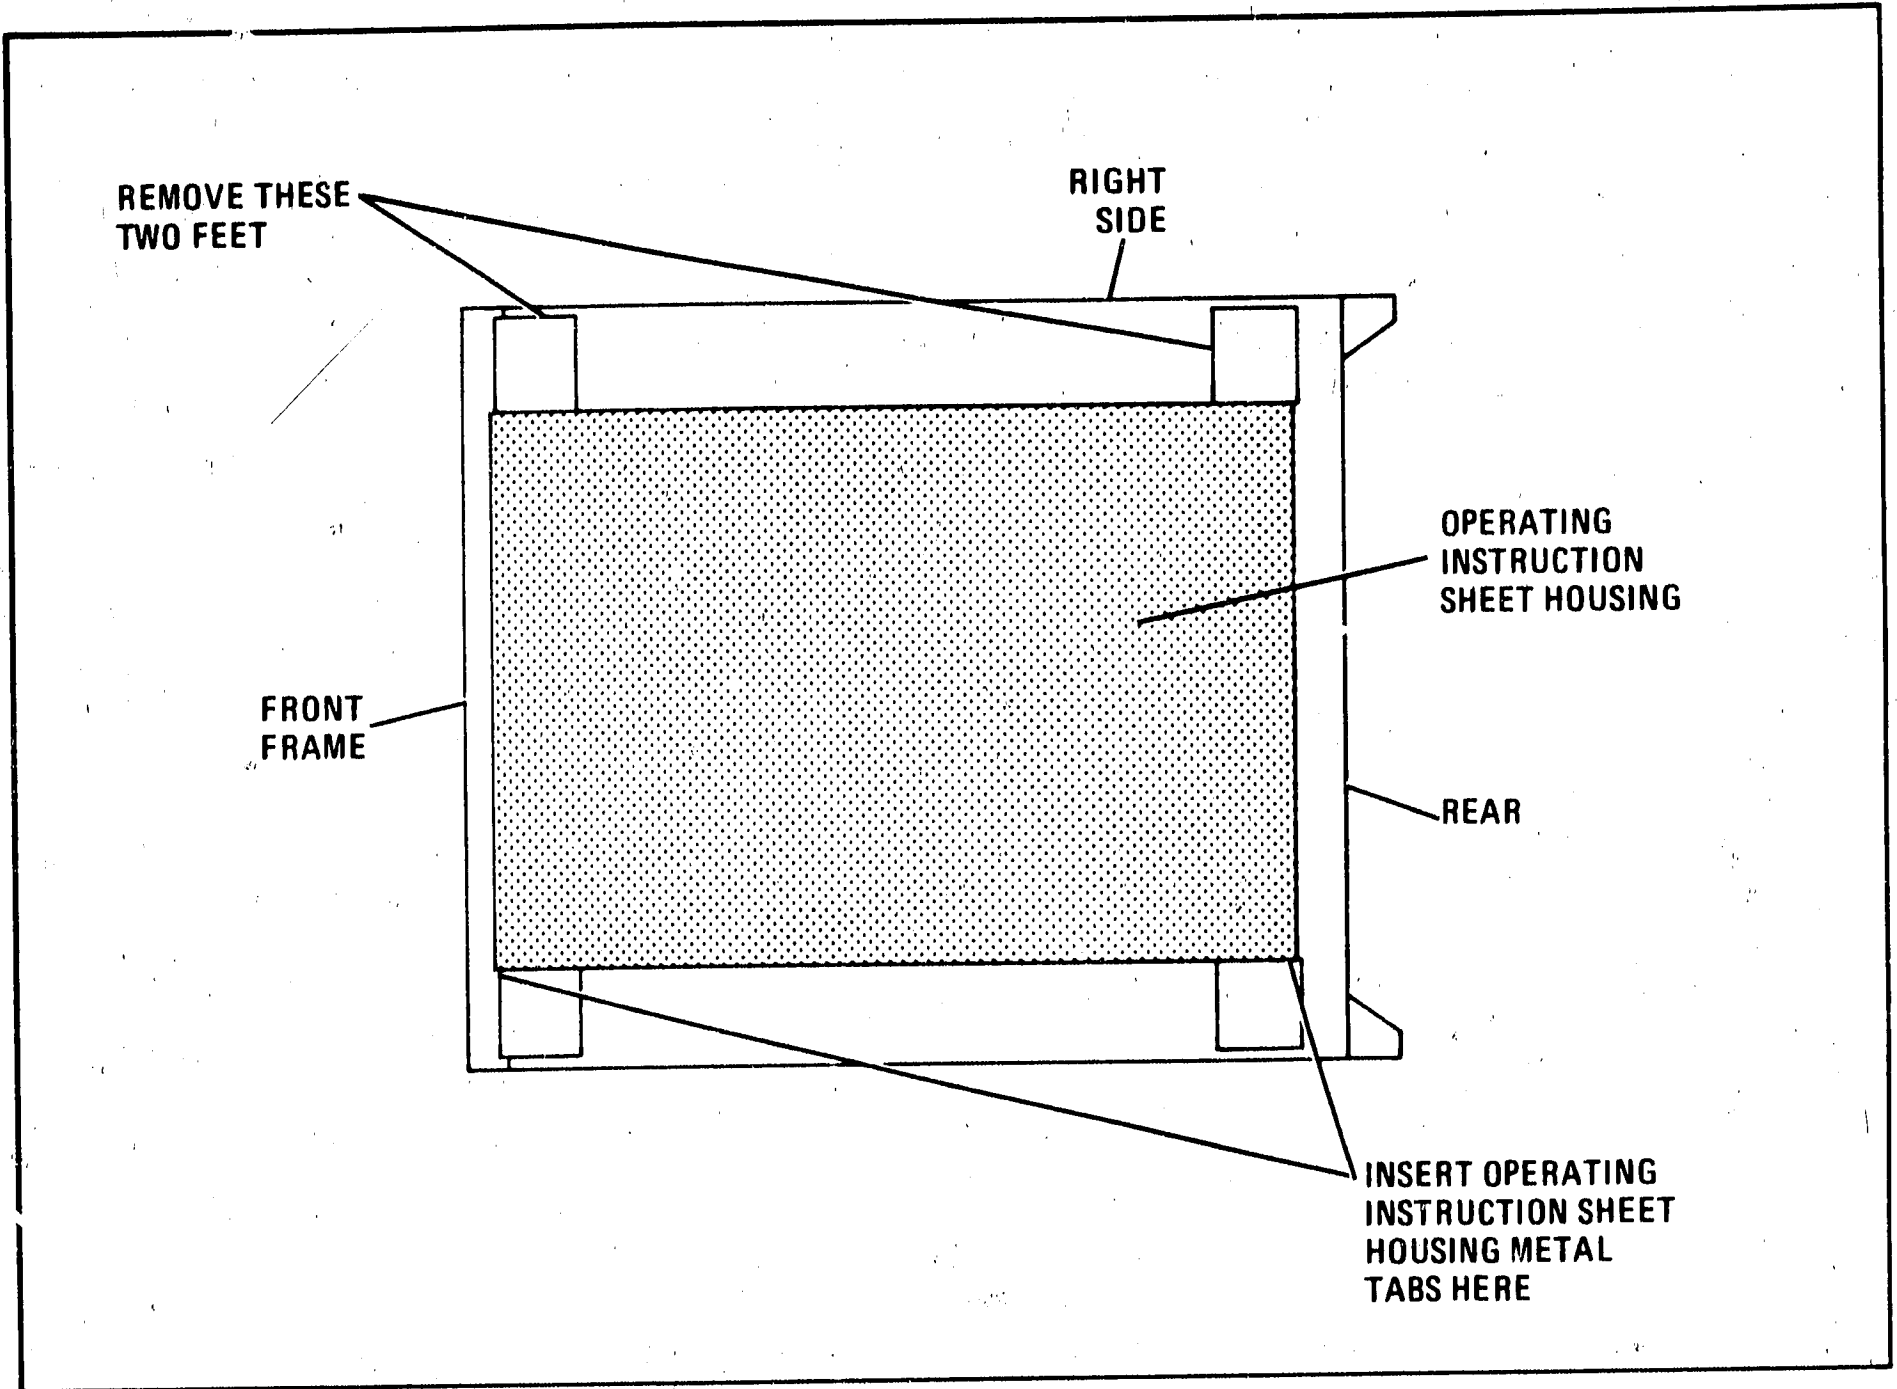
Changing 8505A Operating Instruction Sheet to Bottom of 8503A
